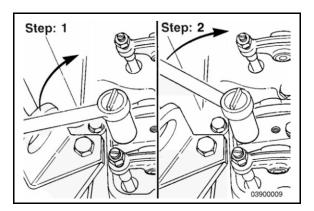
TIGHTEN THE 12 MM PEDESTAL/CYLINDER HEAD CAPSCREWS
